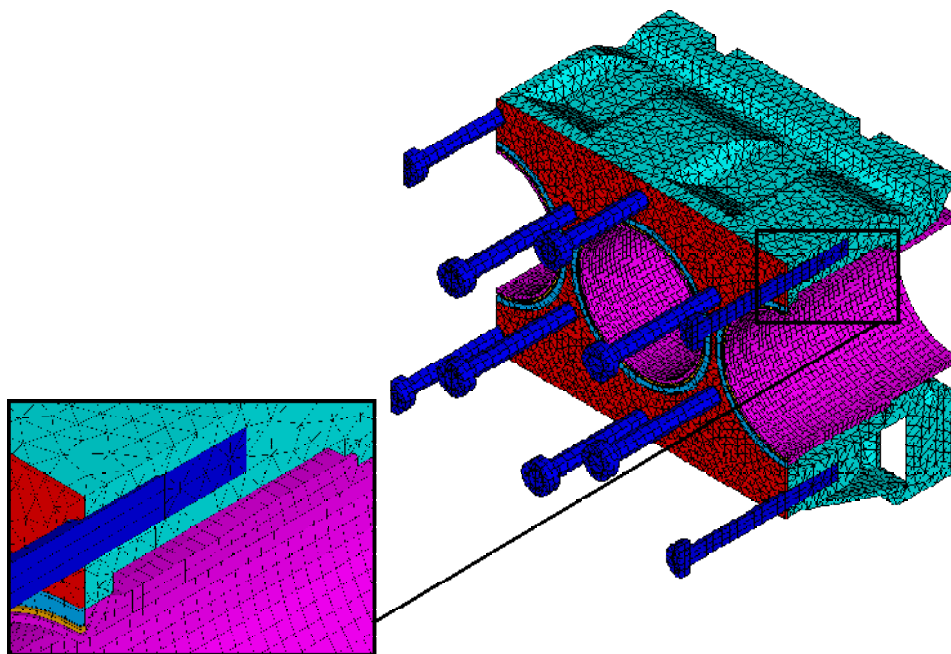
Isometric View showing Cylinder Block, Liners, Head Capscrews and Head Gasket
